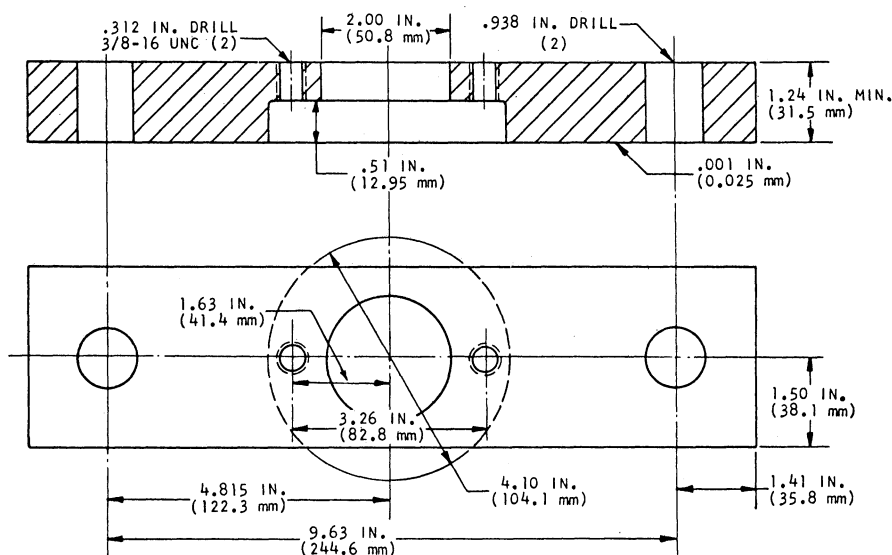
Special tool shown in Fig. 199 can be fabricated using dimensions shown.
